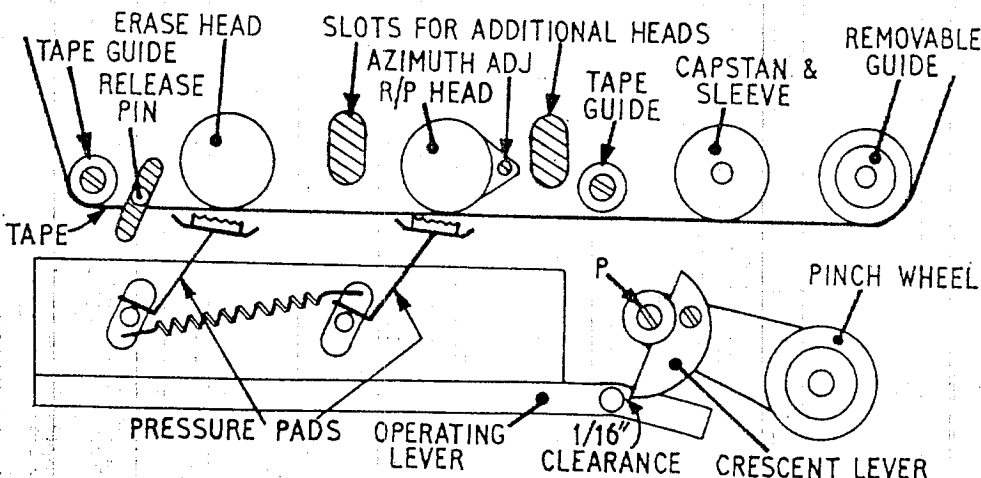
Layout of heads, tape guides, pressure pads, capstan and pinch wheel. A single screw adjustment is used for azimuth alignment of the record/replay head. Screw P should be set to give 1/16 in. clearance at point indicated when pads are engaged
